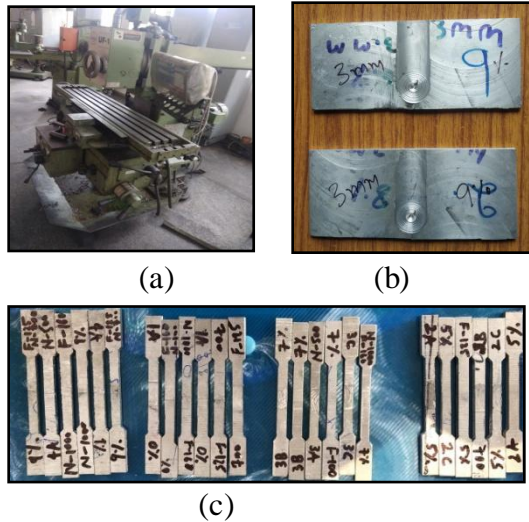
(a) FSW Machine (b) Welded Plates using FSW (c) Tensile test specimens
